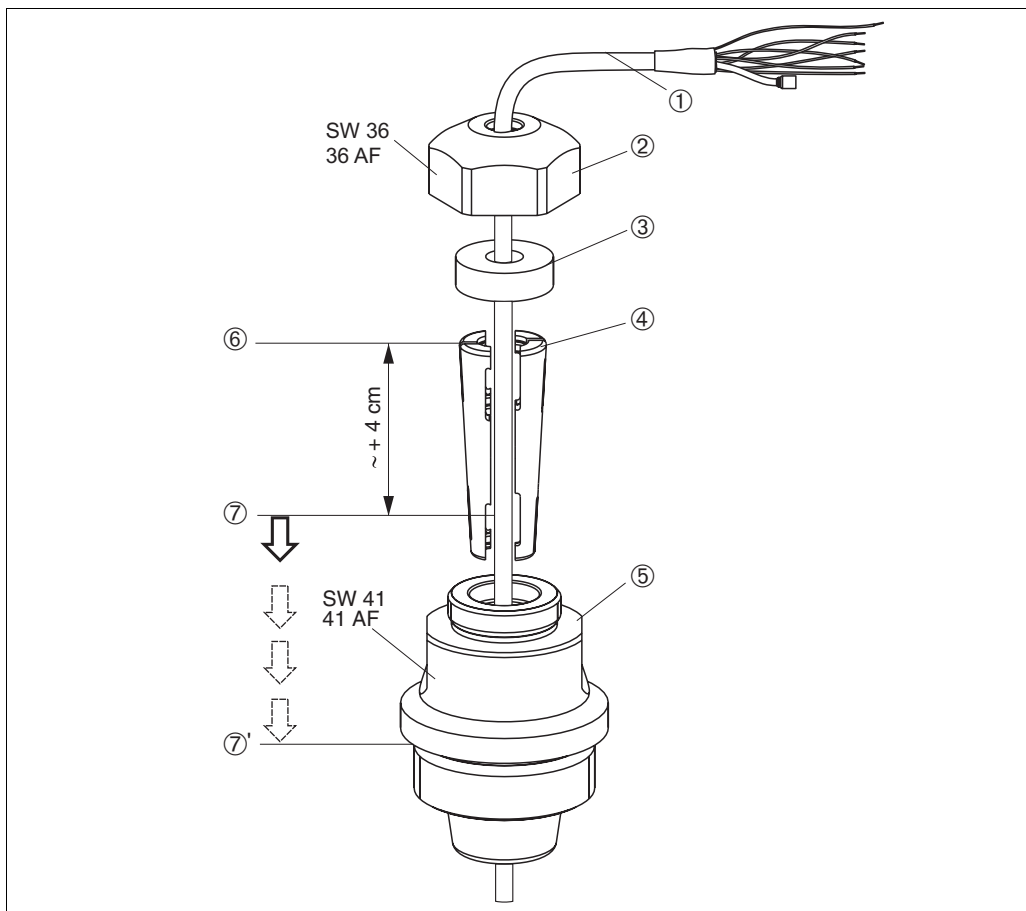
Installing the Waterpilot FMX167 with cable mounting screw, here depicted with G 1 1/2 thread
